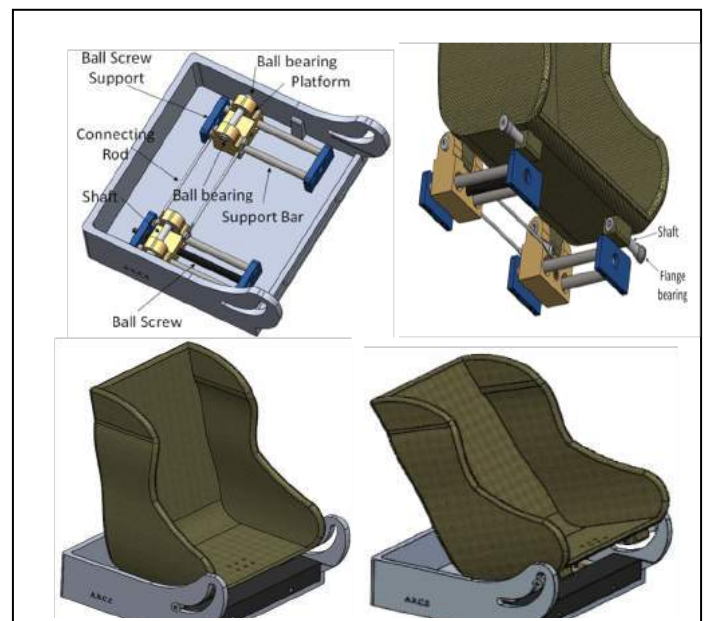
Lower base (top-left), Upper base (top-right), Initial position of seat (bottom-left), final position of seat (bottom-right).
